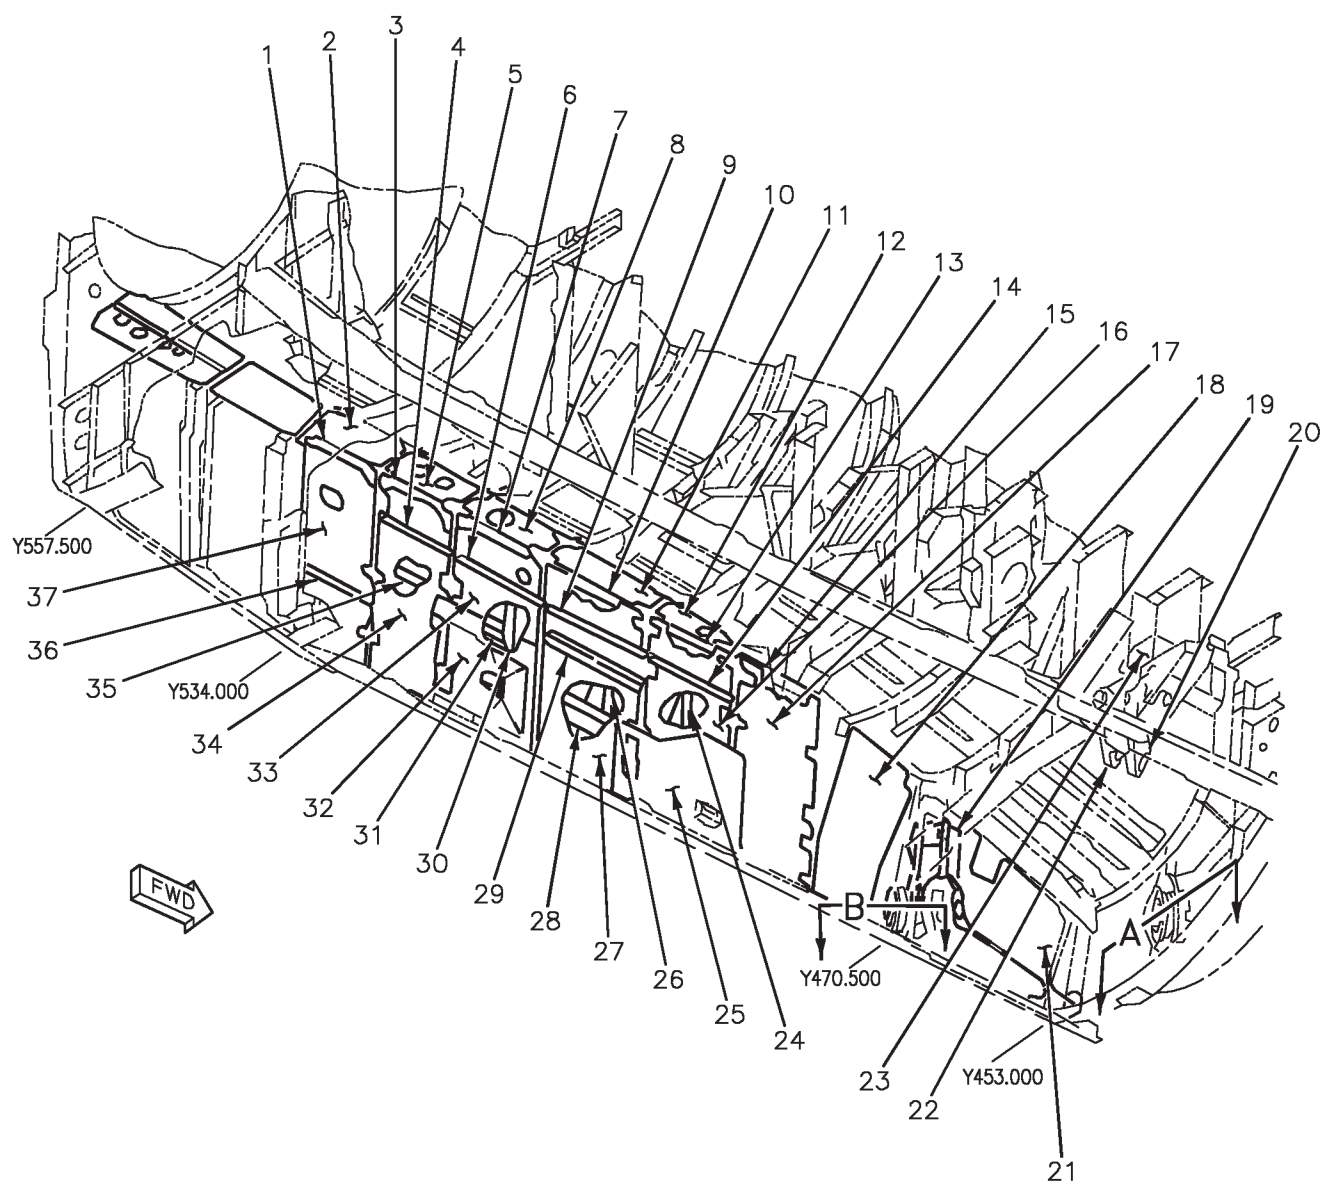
Main Landing Gear Wheel Well (Sheet 1)
